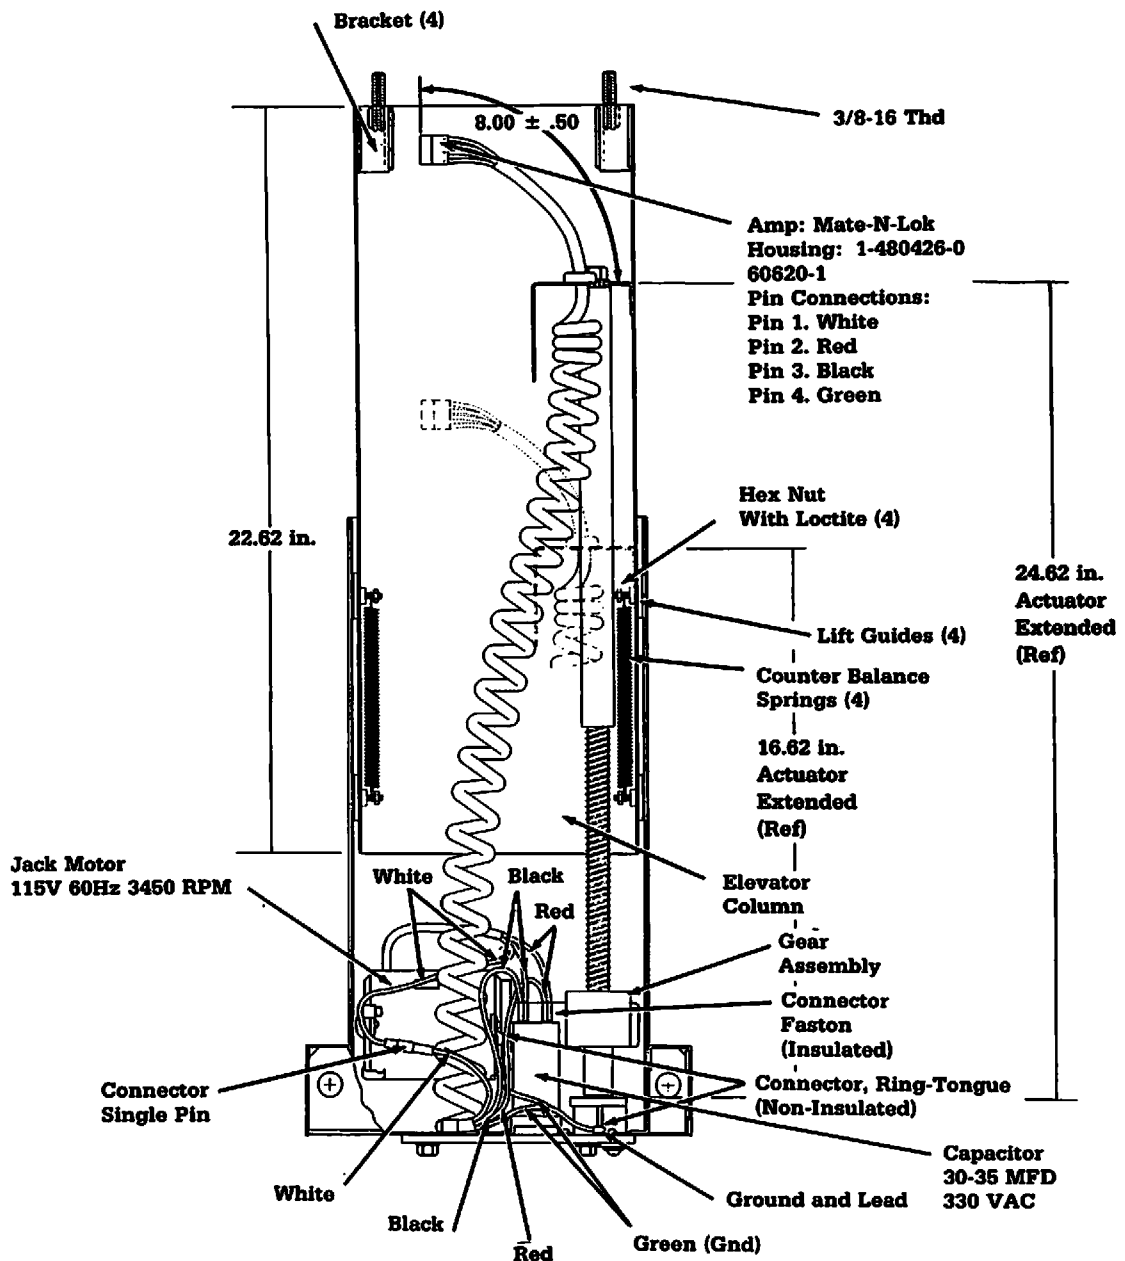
Cut-away, Internal Side View; Cable and Wiring Connections
